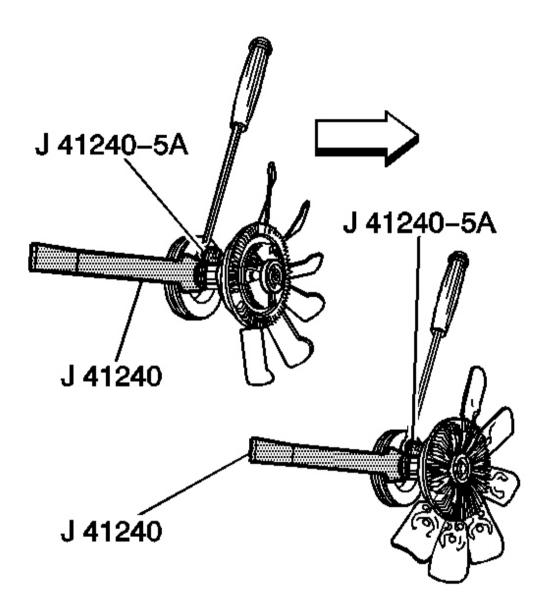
Using Special Tools For Fan Clutch Courtesy of GENERAL MOTORS CORP.
